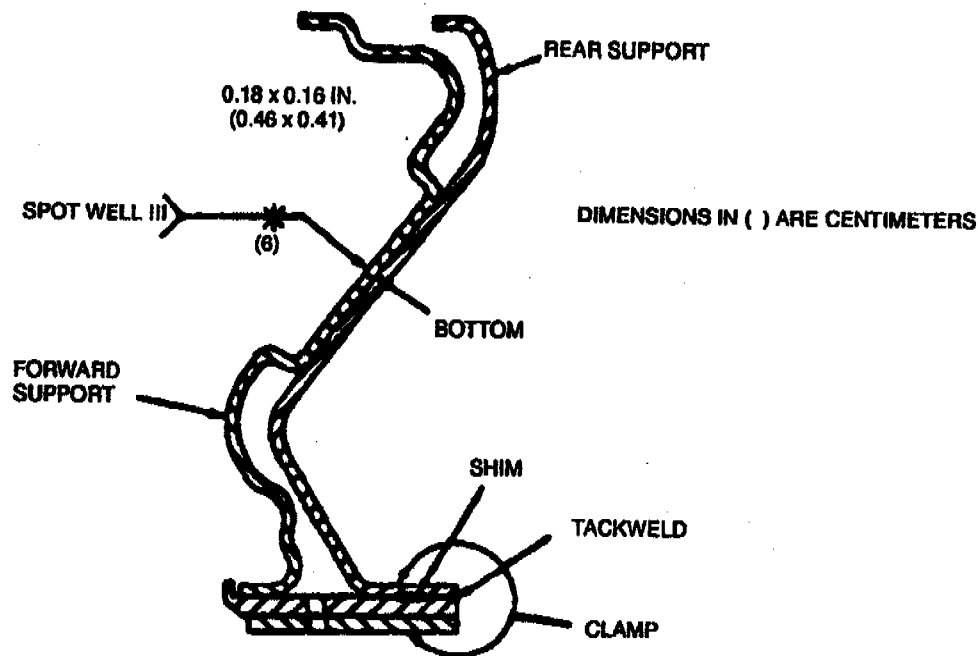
Assembly and Installation of Forward Nozzle Support to Seal Assembly.
